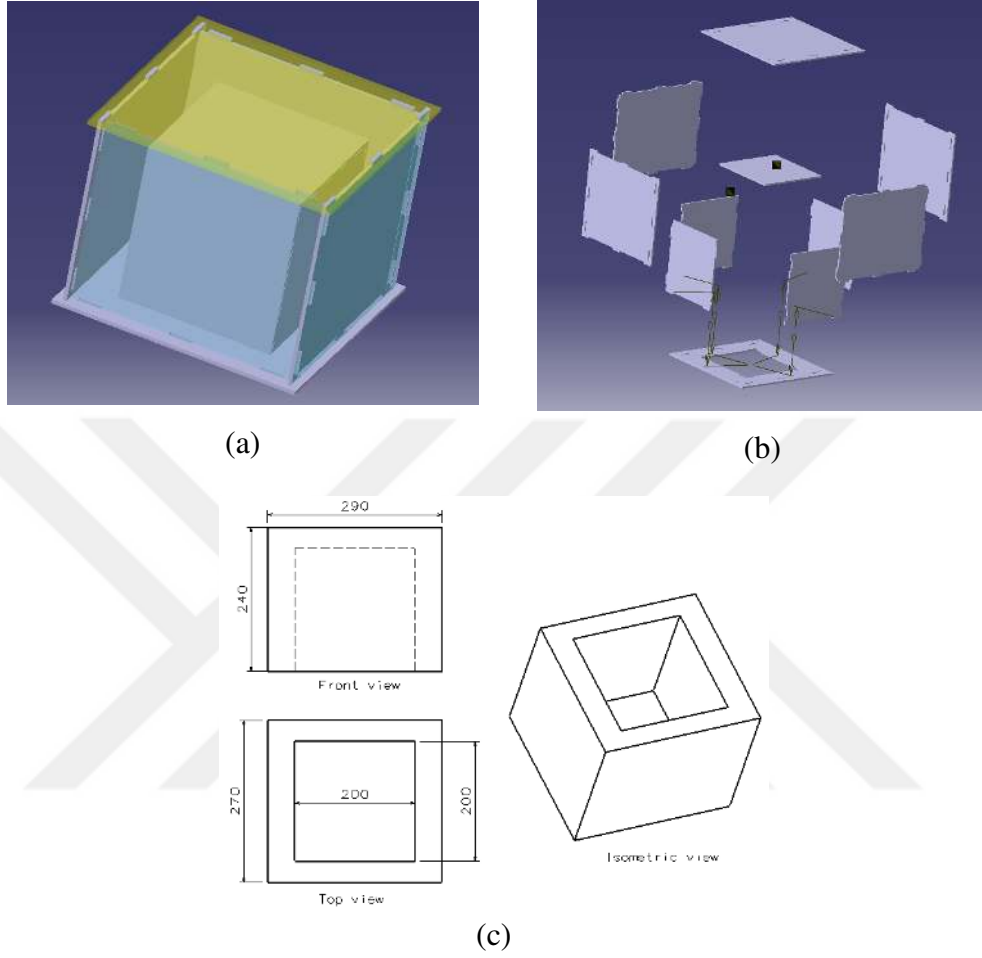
Mold for specimen fabrication (first stage), (a) 3D model, (b) exploded view, (c) technical drawing- dimensions in mm
